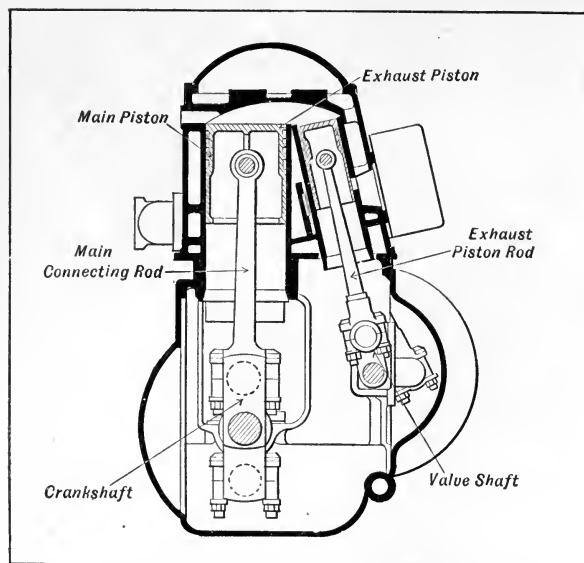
Section of Hewitt Piston Valve, Motor Cylinder and Valve Chest.
